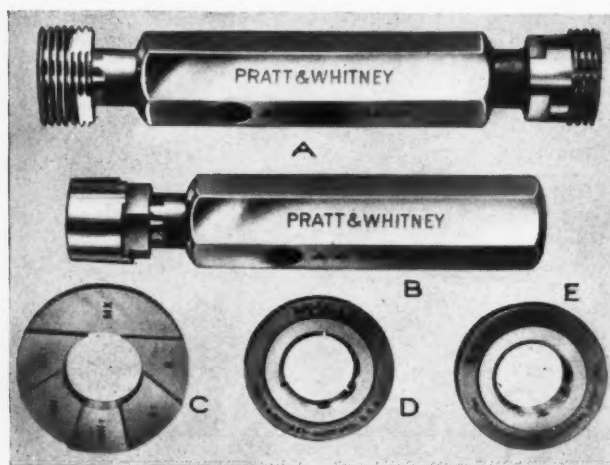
(A) P&W Gage for Checking Lead, Form, and Taper of Internal Aeronautical Pipe Threads. (B) Plain Taper Plug Gage Used with Gage A to Check Taper, Roundness, and Minor Diameter. (C, D, and E) Ring Gages for External Pipe Threads
